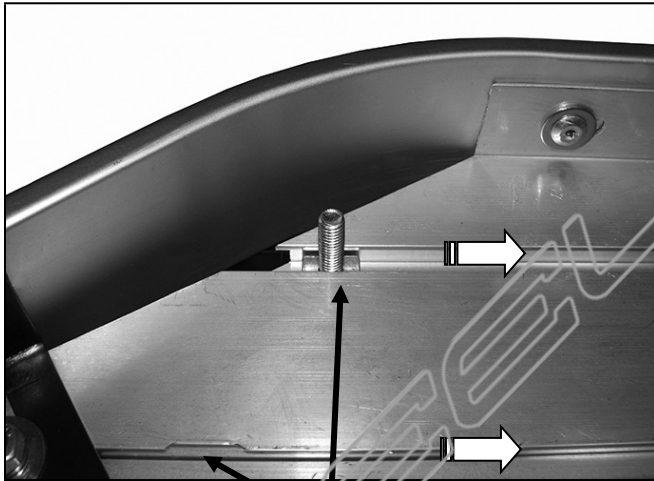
Remove rubber plug. Slide 8mm Clip Nut into large hole and over small hole
